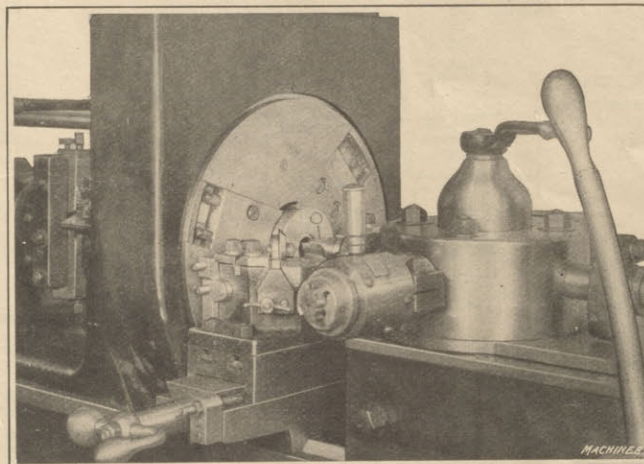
Set-up showing Sixth Operation on Head End of Case
